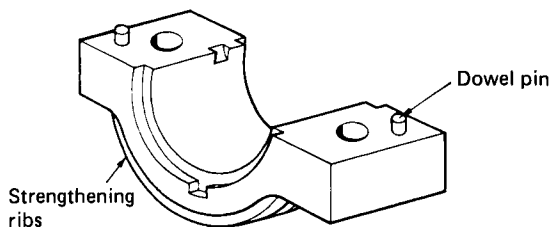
Bearing cap for main bearing, showing dowel pins for accurate alignment with upper half of bearing in the crankcase
